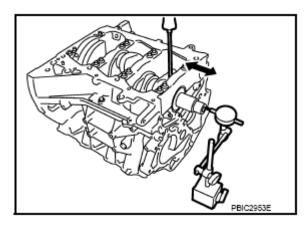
Measuring Crankshaft End Play Using Dial Indicator Courtesy of NISSAN NORTH AMERICA, INC.
